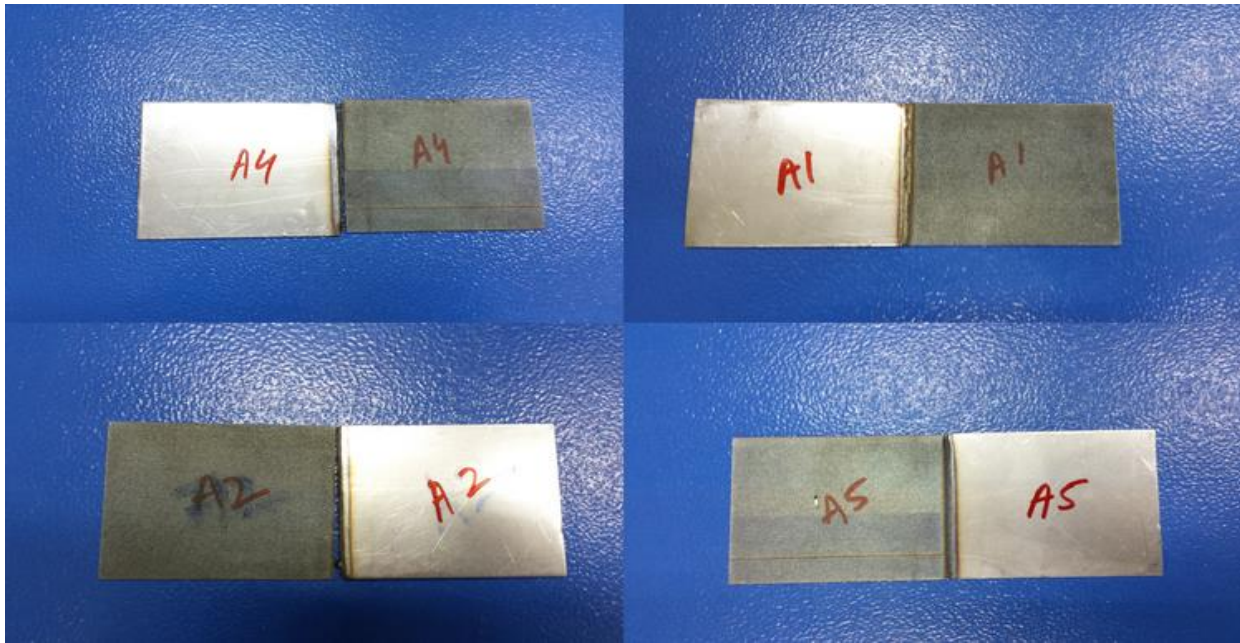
Laser welding of SS-Ti with Nickel as filler
